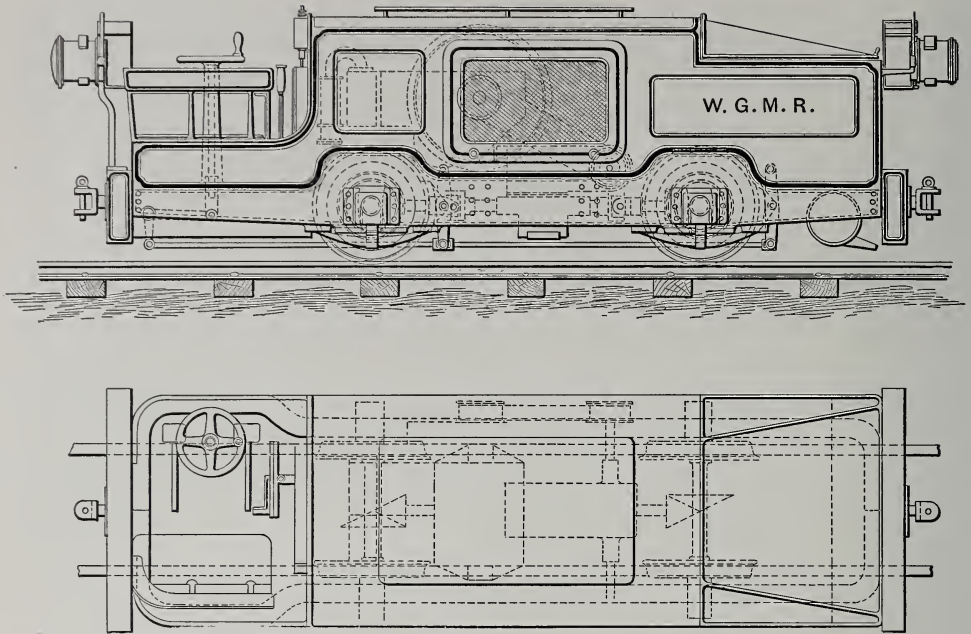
A SMALL PETROL LOCOMOTIVE BUILT BY THE WOLSELEY TOOL & MOTOR CAR CO., LTD., BIRMINGHAM, ENGLAND
